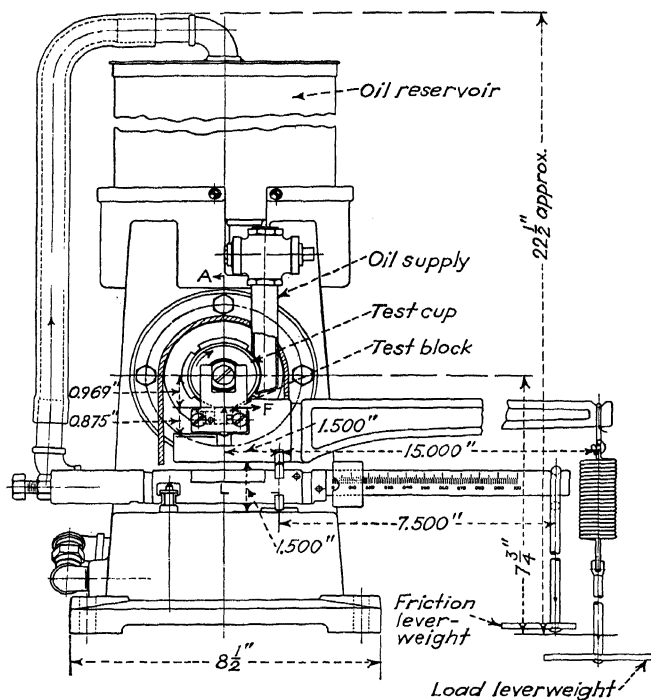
Timken E.P. lubricant- and wear-testing machine.
